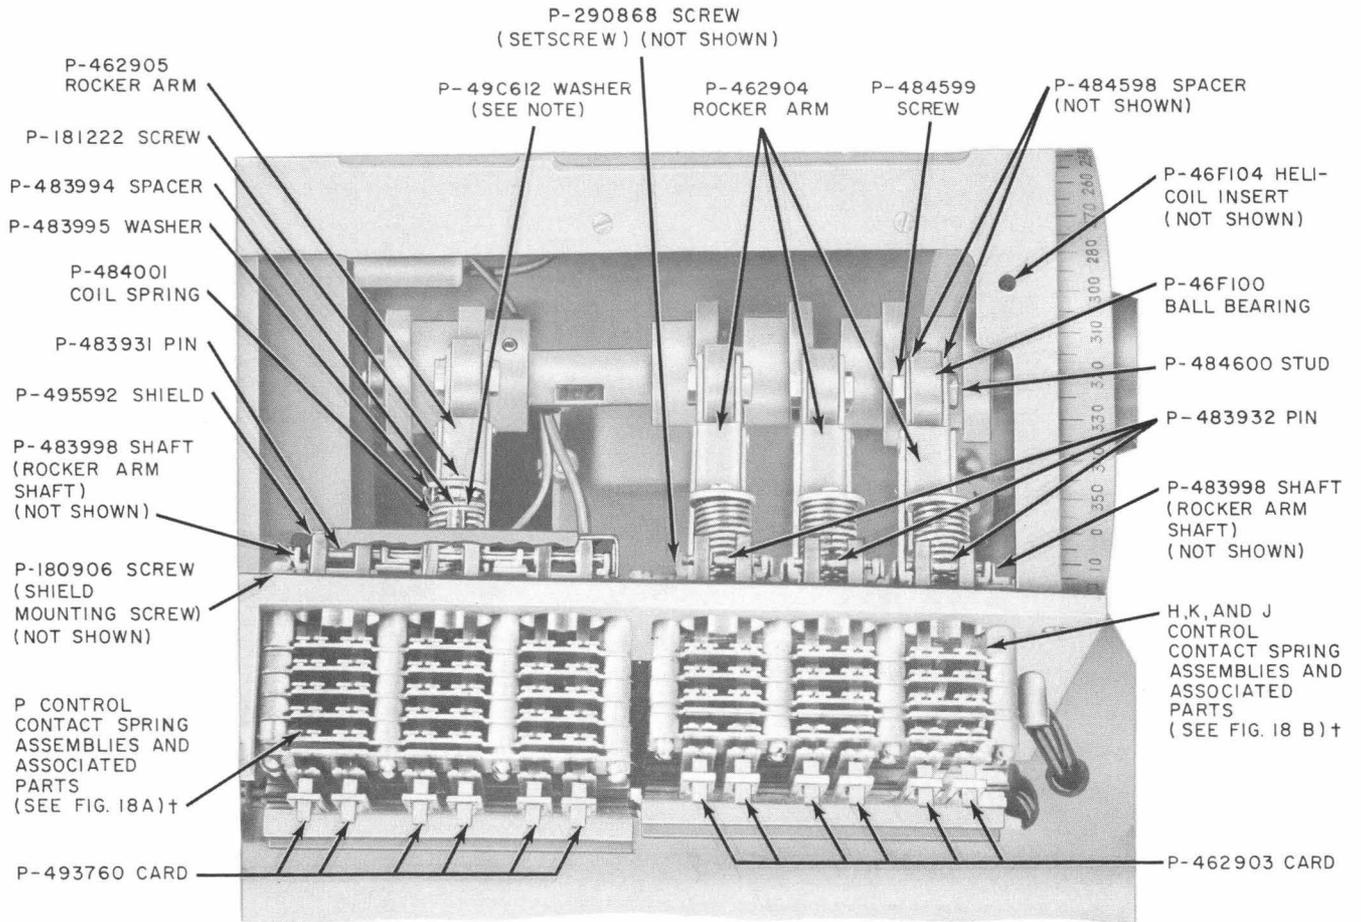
KS-13835 L2, L3, and L4 Readers—Control Contact Assembly—Contact Spring Assemblies and Associated Parts—H and J Contacts
